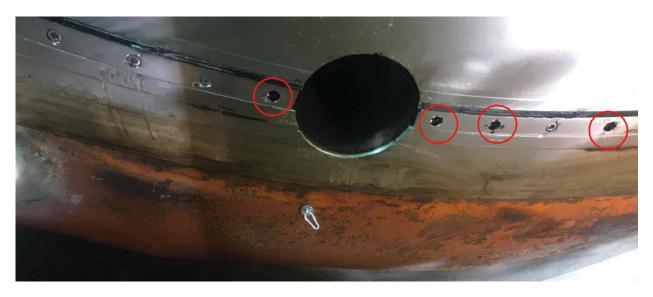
Head Cover, Seal Retaining Plates (Missing Screws)
